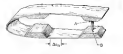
(left) Typical cantilever construction on single beam and mated complex with collectors and ball leading edge.
